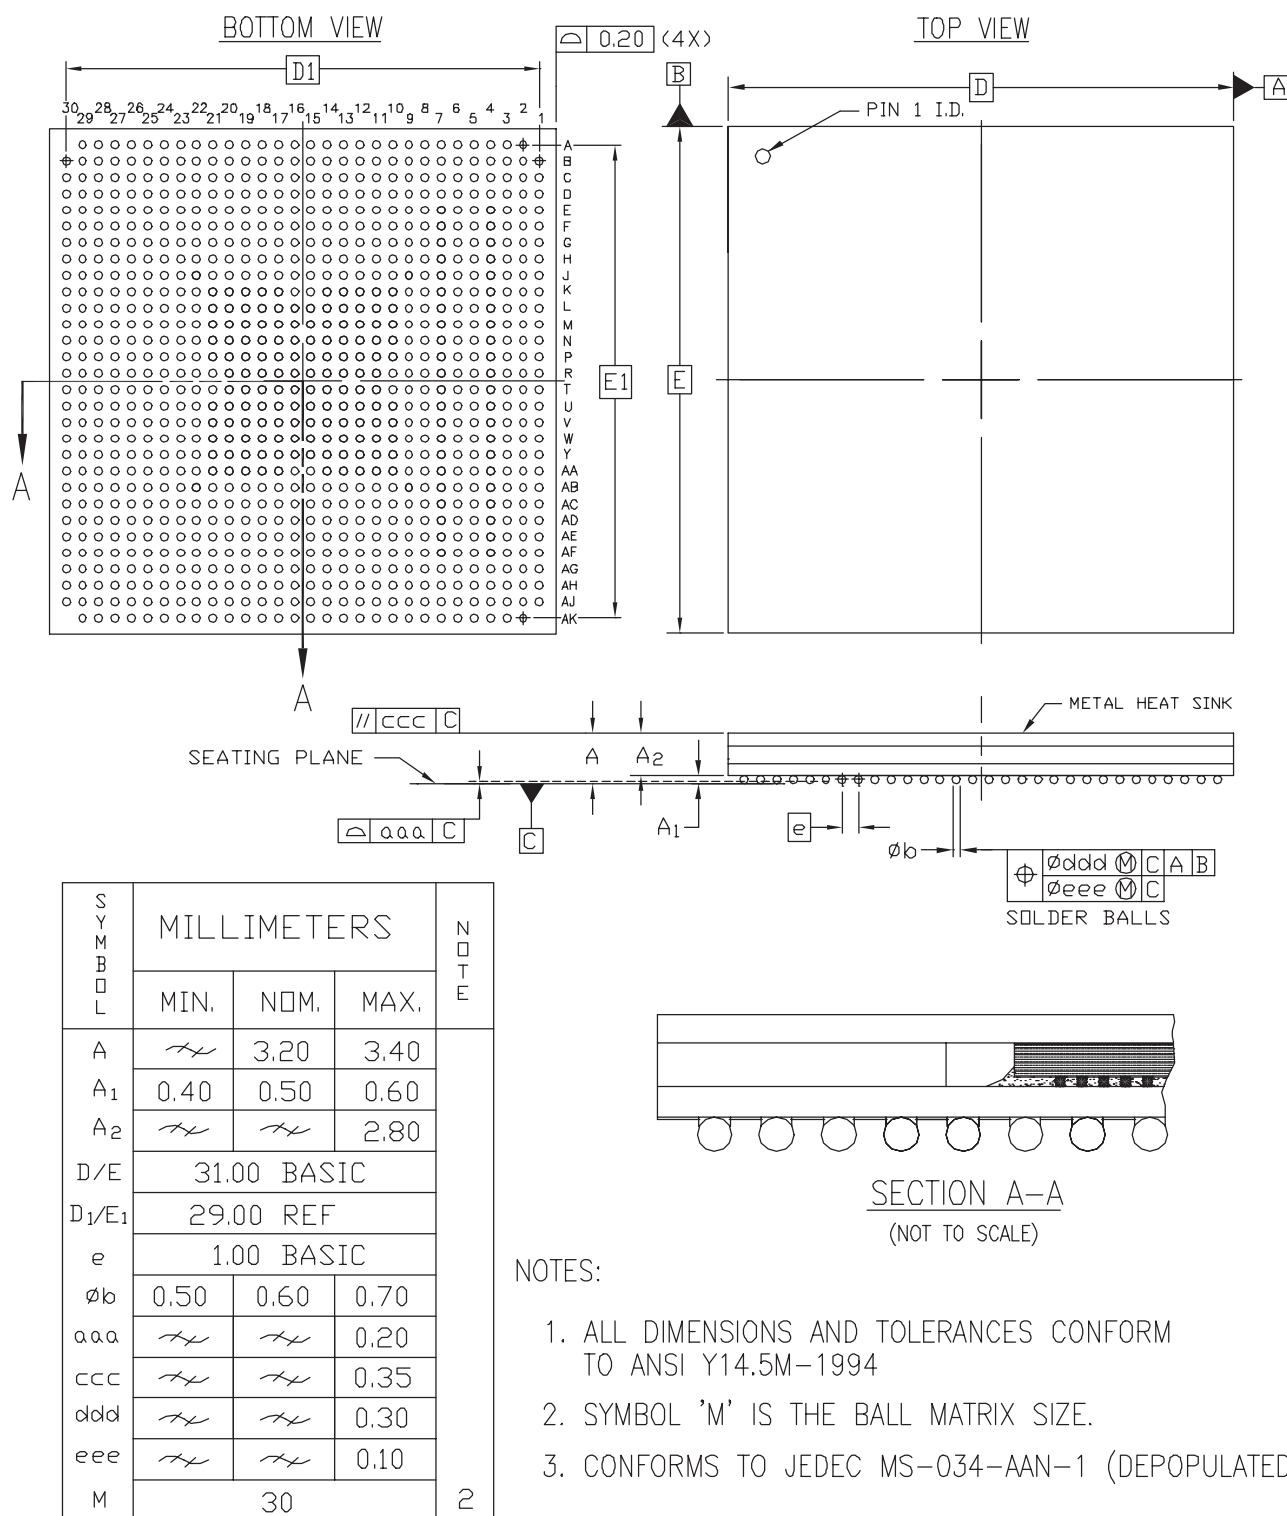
FF896 Flip-Chip Fine-Pitch BGA Package
